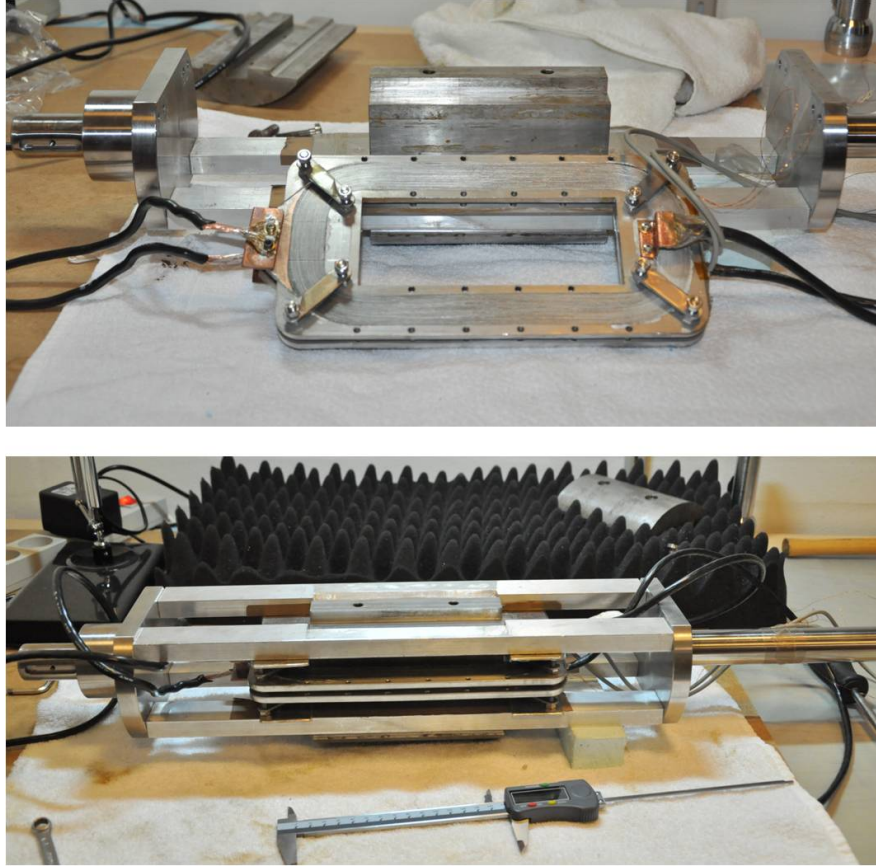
HTS field winding - The HTS field winding is shown in assembly phase with two HTS coils mounted on the cold steel.
